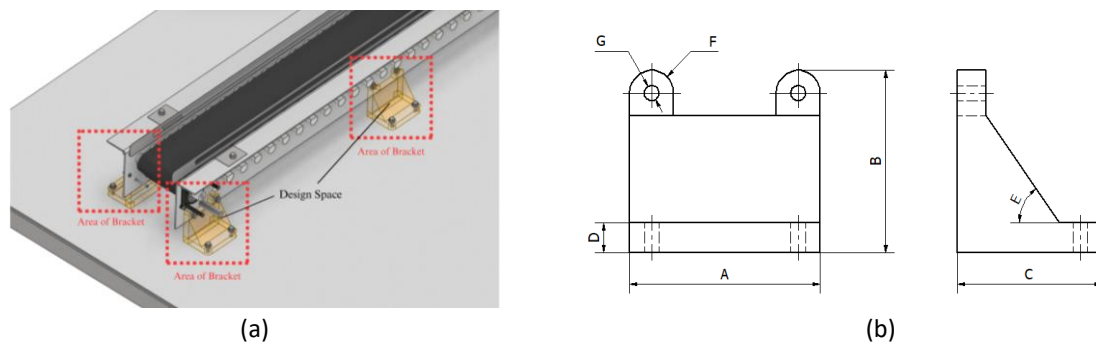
Geometry (a) placement of bracket on conveyor belt and design space for computation, and (b) detail dimension of initial design for optimising
